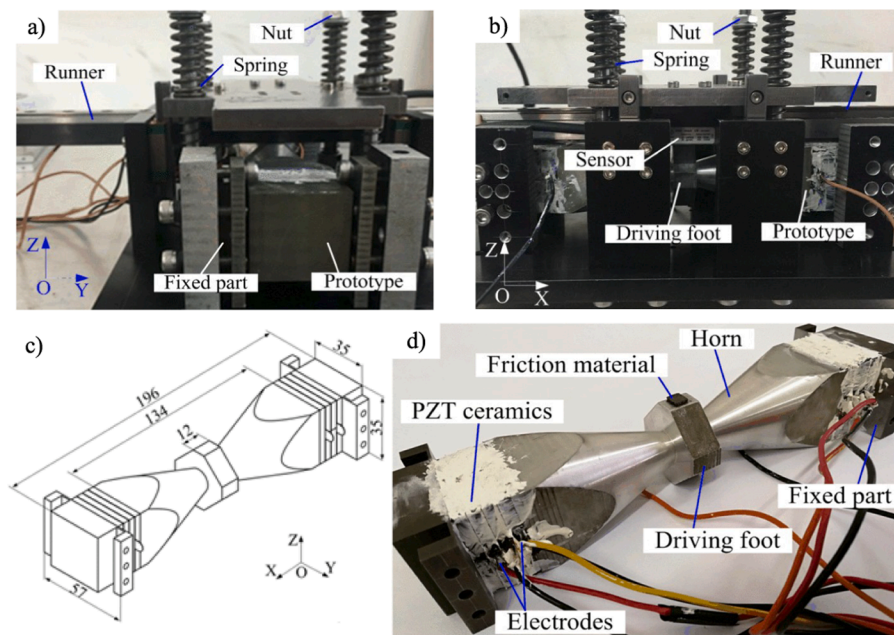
Prototype of the PUSM presented in [165]: a) Measurements in Y axis, b) Measurements in X axis, c) Prototype's dimensions, d) Manufactured prototype. Figures "© 2021 IEEE. Reprinted, with permission from [165]."
